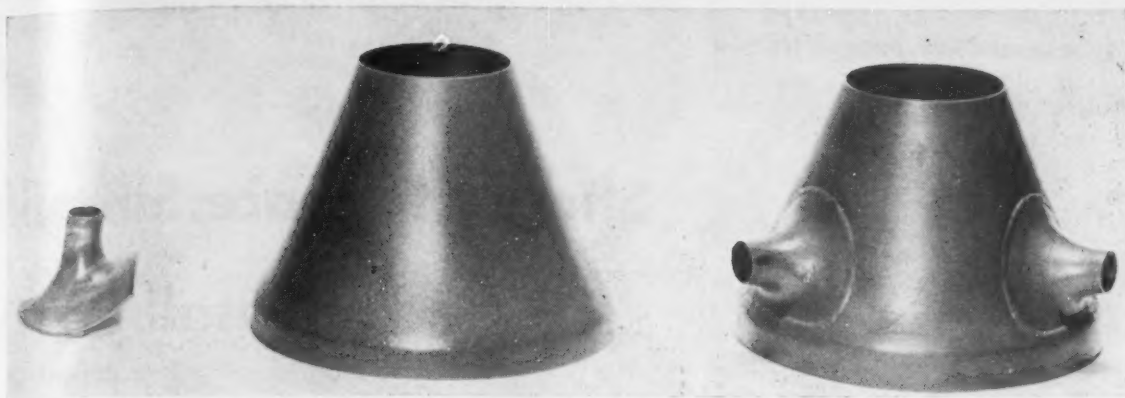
Cone, blanked to take three bosses is fusion welded to make assembly at right.
